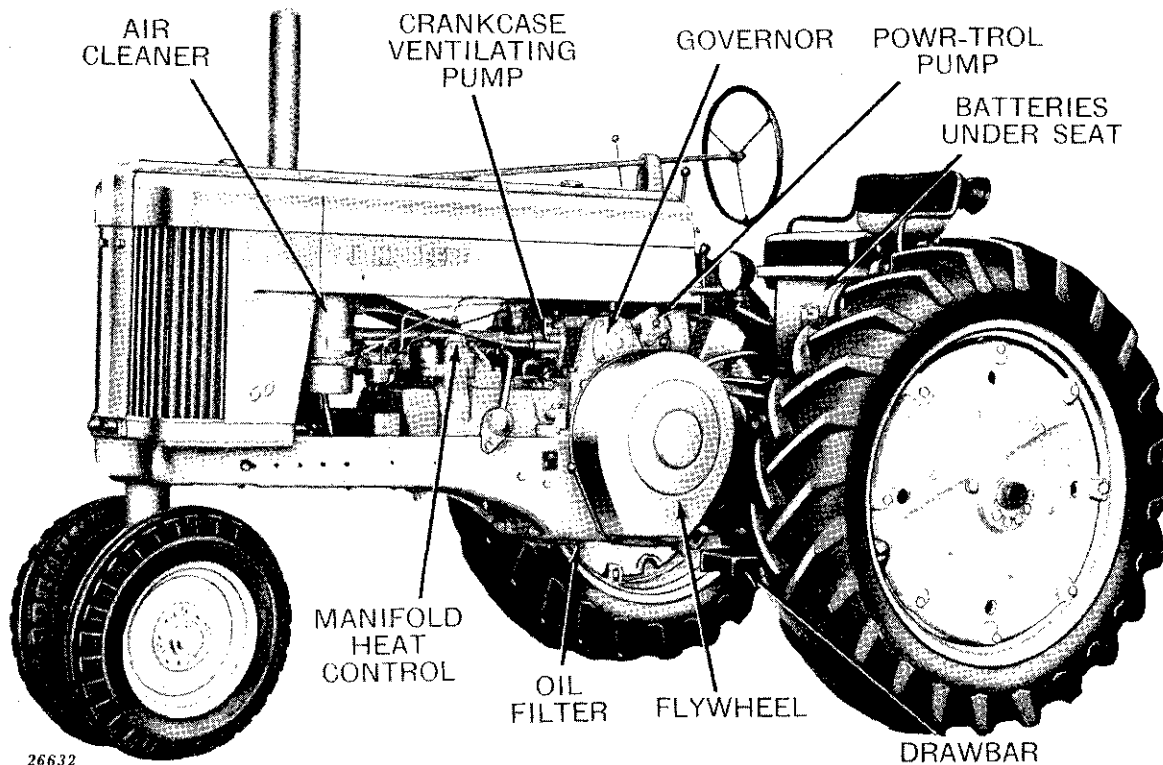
John Deere Model "60" Tractor—Flywheel Side
